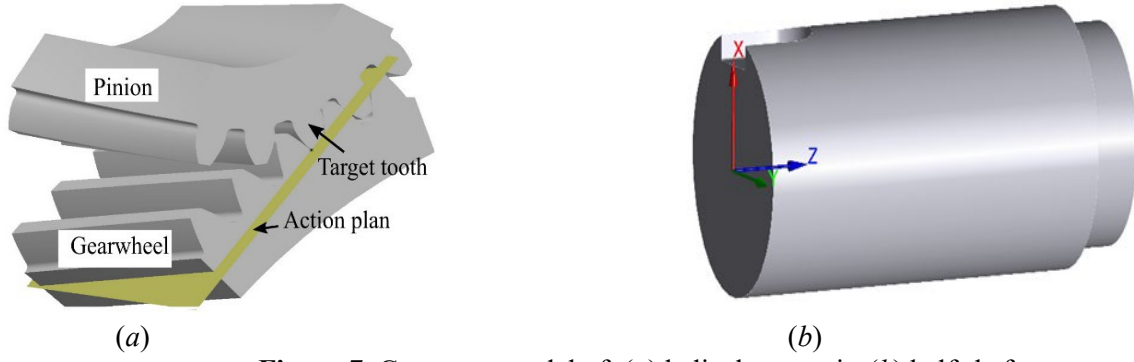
Geometry model of: (a) helical gear pair, (b) half shaft.
